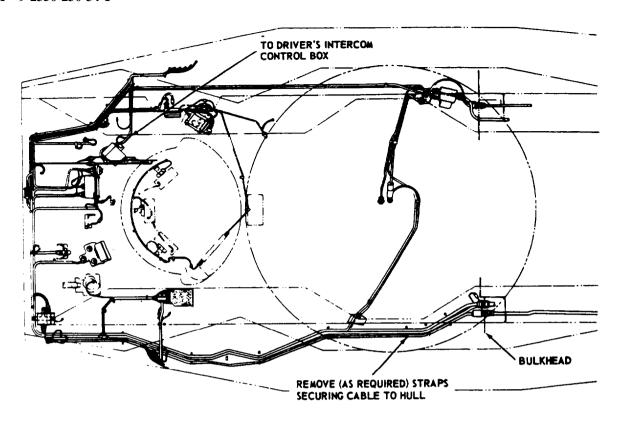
Removal/installation - turret power day-to-slip ring.
